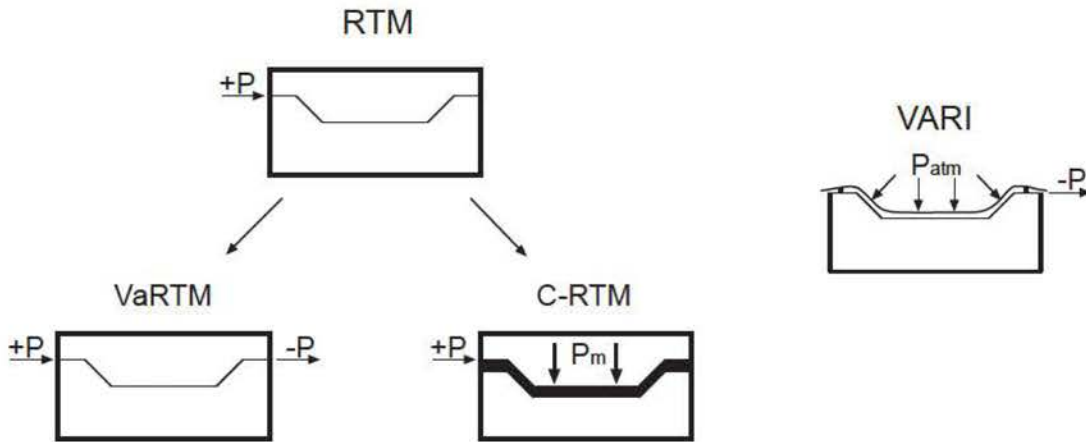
Infiltration techniques for composite manufacturing. Close (left side) and open mold process (right side).
